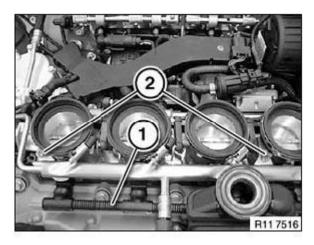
Identifying Fuel Injectors And Screws Courtesy of BMW OF NORTH AMERICA, INC.
